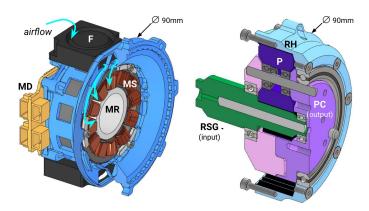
EMBiR lab's gearbox CAD. Input assembly is pictured on the left, including a fan (F), motor driver (MD), motor stator (MS), and motor rotor (MR). The right image shows the transmission assembly, including a rotor-sun gear (RSG), planet carrier (PC), planet(P), ring gear and housing (RH). (Urs et al. 2022)
